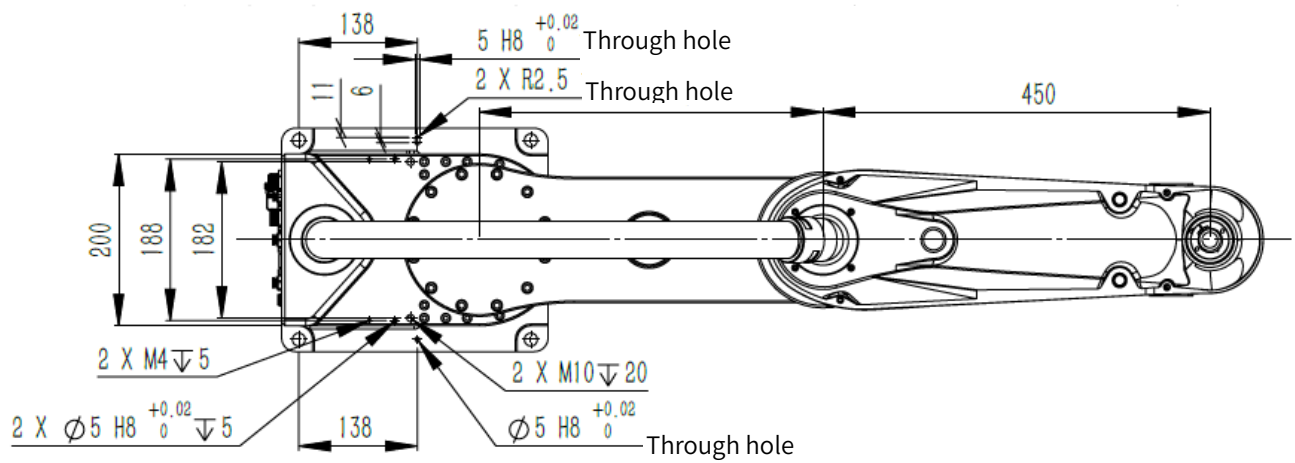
AH20-0850-0204-4000 dimensions (unit: mm)
